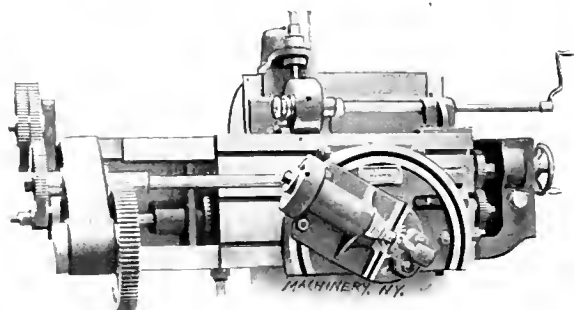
Helical Gear-cutting Attachment used with the Atlas Gear-cutting Machine shown in Fig. 34.
